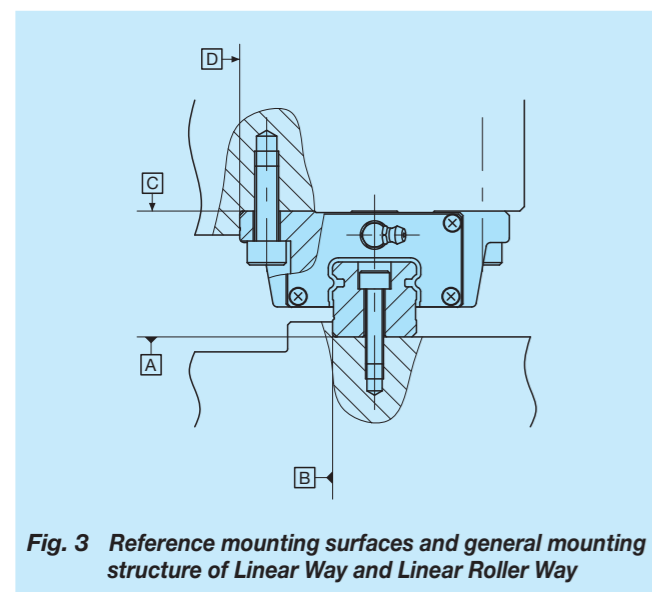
Reference mounting surfaces and general mounting structure of Linear Way and Linear Roller Way
